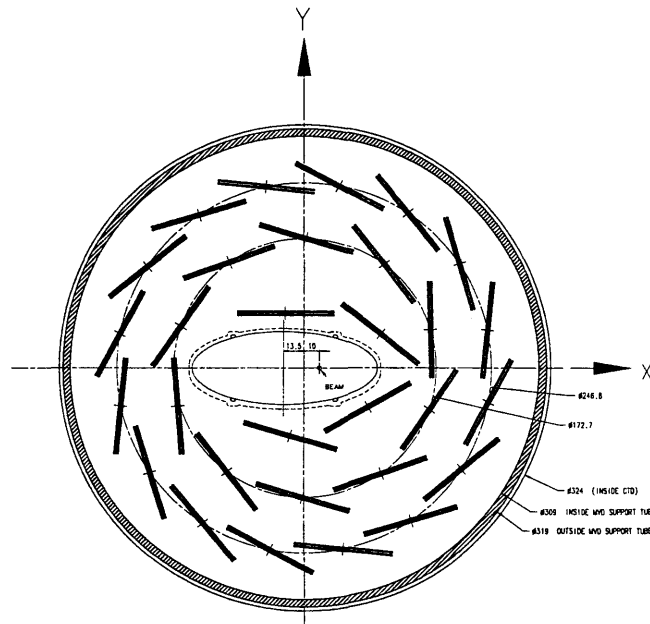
BMVD section: 3 superlayers around beam pipe are shown.
